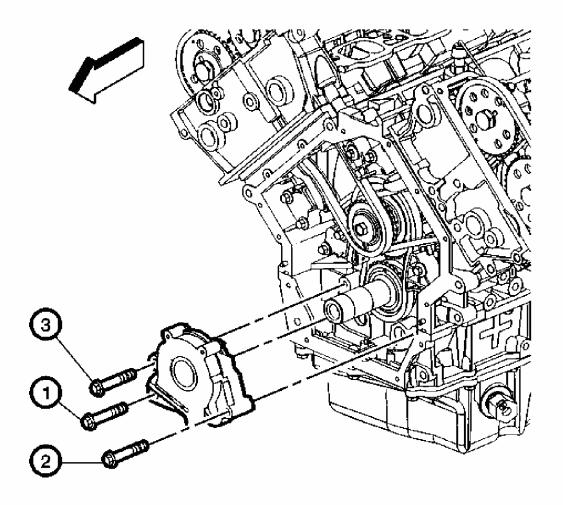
Identifying Oil Pump Assembly Retaining Bolts Courtesy of GENERAL MOTORS CORP.
